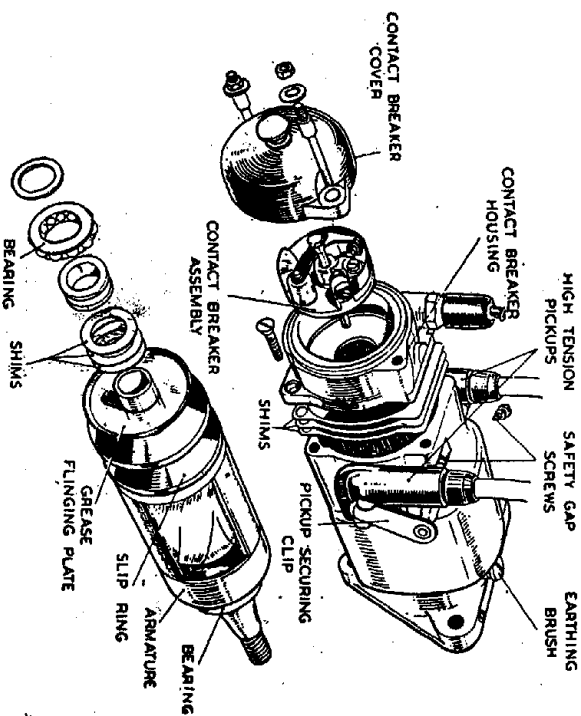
EXPLODED VIEW OF THE LUCAS K&F MAGNETO.
